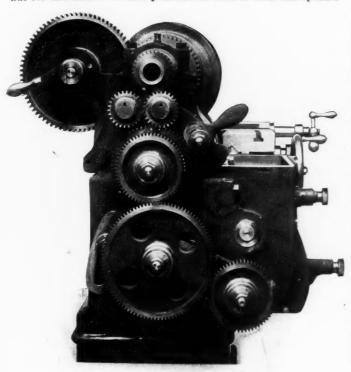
End View of Cincinnati Lathe showing Reverse Plate and Segment
